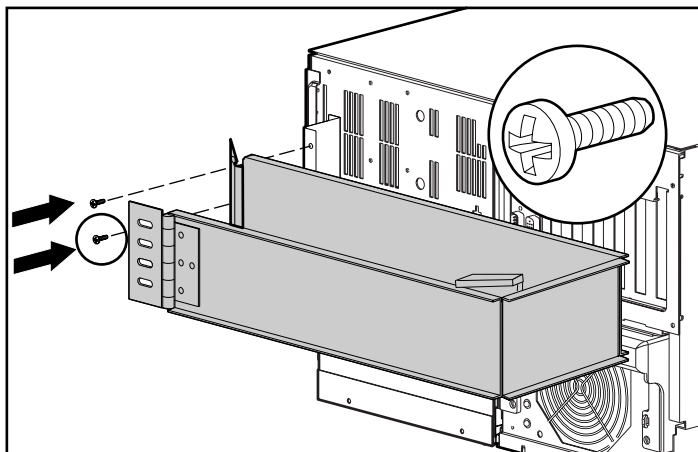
Attaching the cable management arm to the cable management arm bracket
